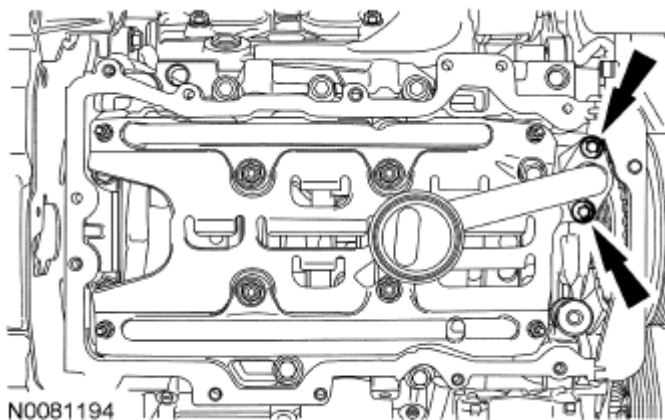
Locating Oil Pump Screen And Pickup Tube
